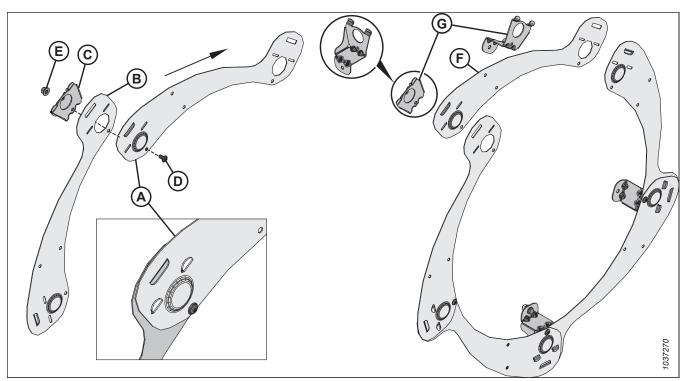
Five-Bat Reel - Initial Endshield Assembly
